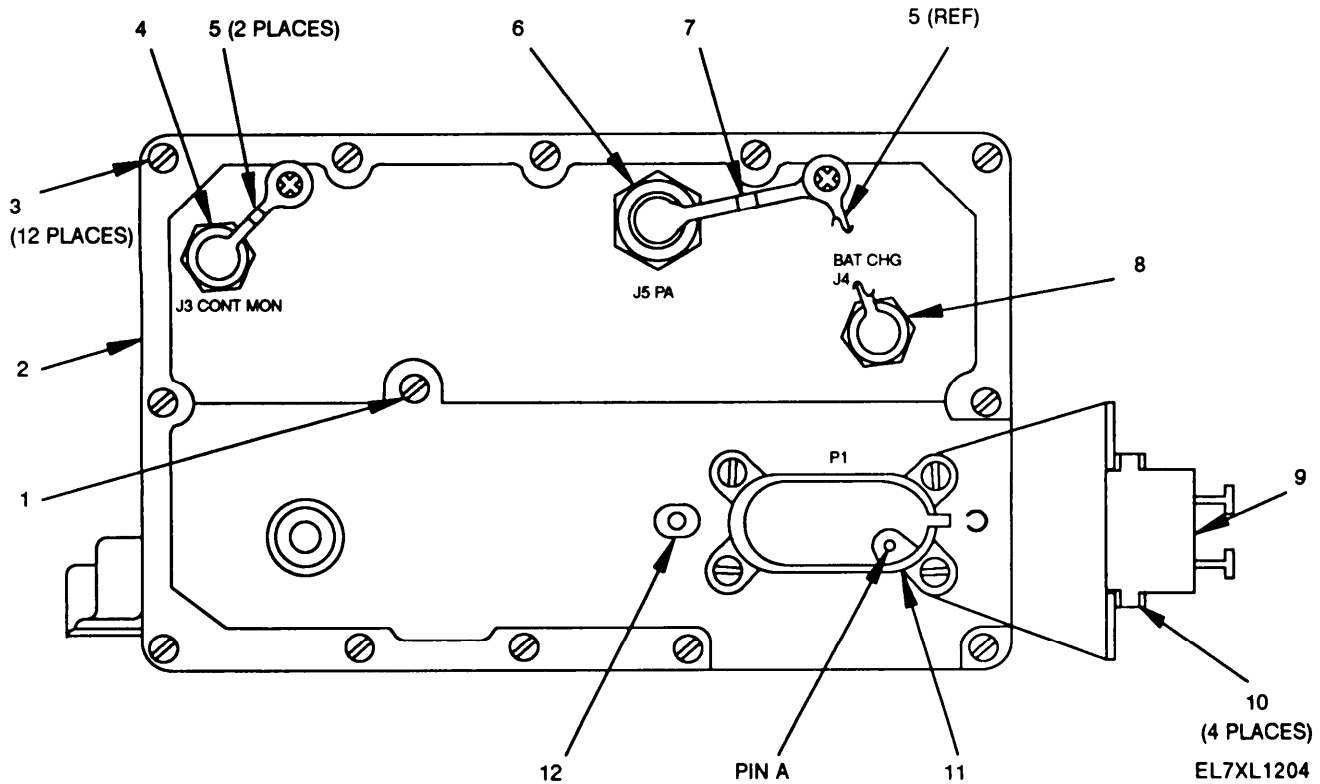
Power Supply Adapter (Rear View) With Rear Access Cover.
